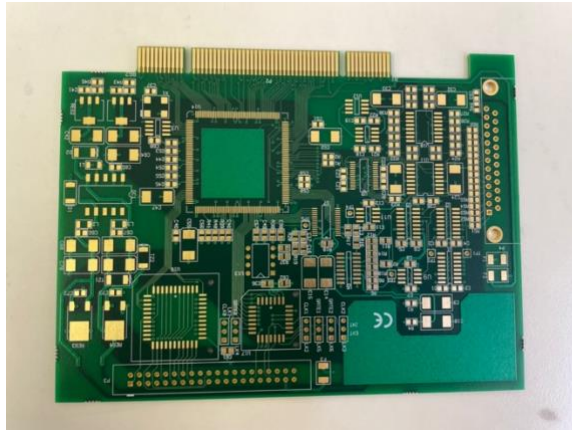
Custom-made PCB with dimensions 142 x 102 x 1,55mm top surface layer (Layer 1)
